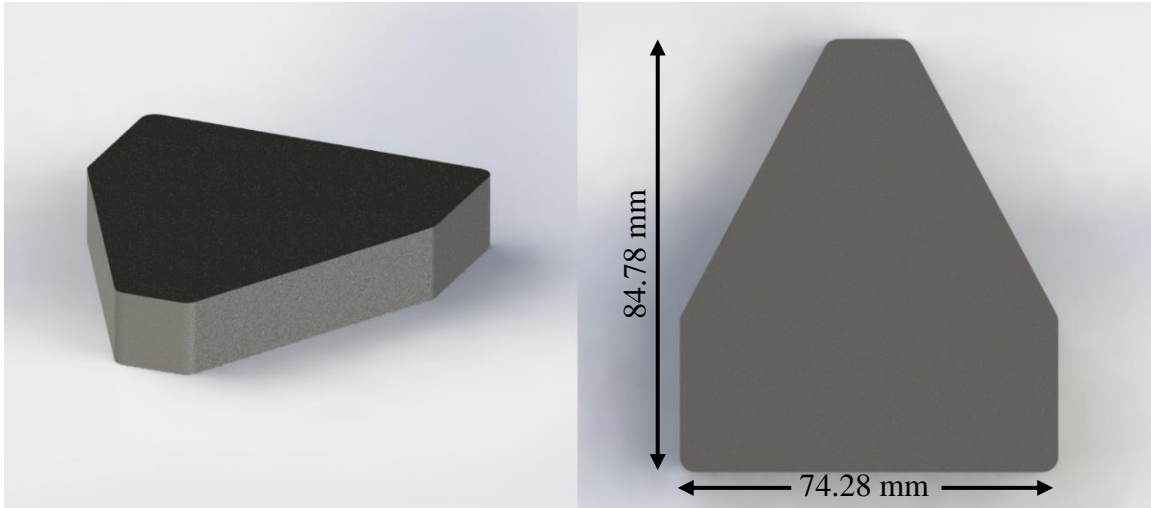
SolidWorks rendering of full-feed combine harvester blanking punch
